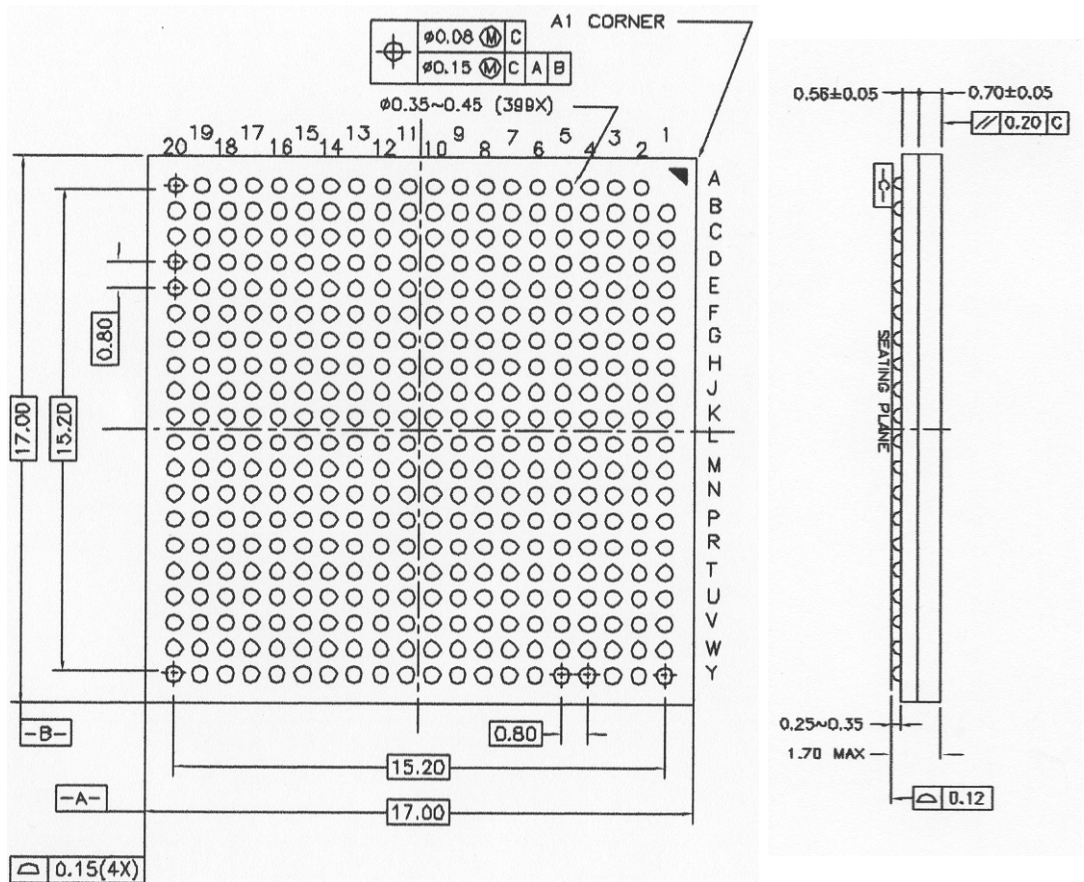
Package Dimensions: Bottom View (left) and Side View (right)
